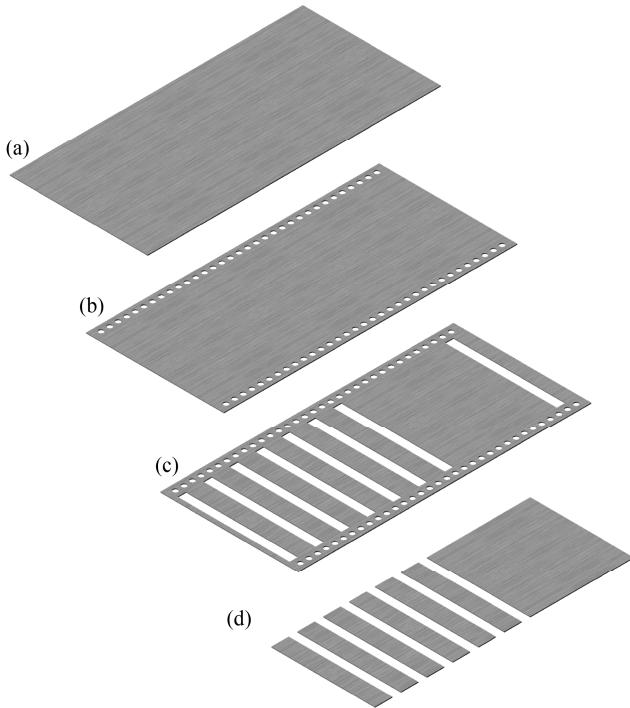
Manufacturing process of single sheet tester specimens; (a), uncut sheet; (b), punching the positioning grid; (c), blanking of six 10 mm specimen and one 60 mm specimen with various different process parameters; (d), positioning grid removal
